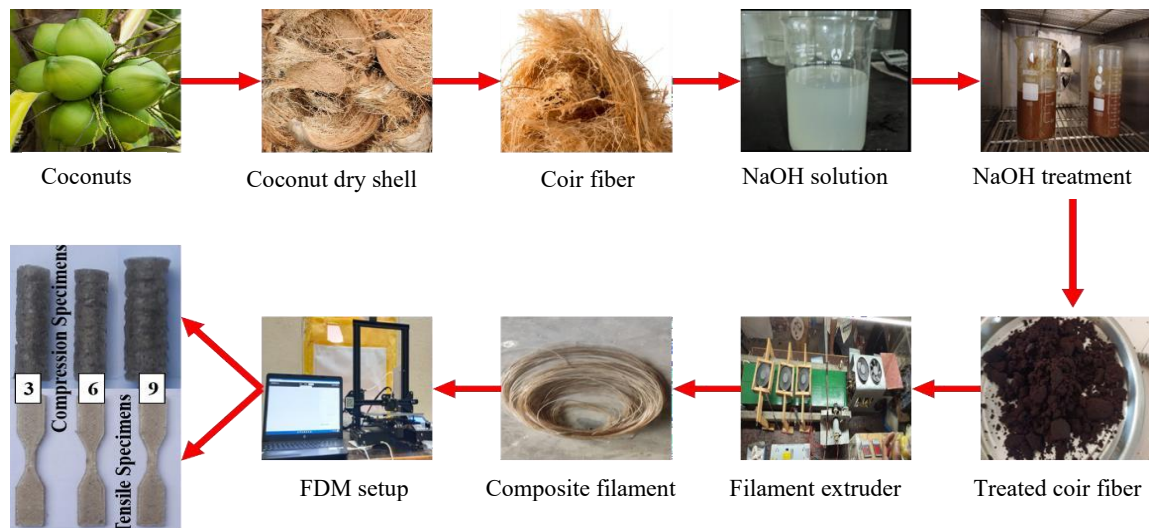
Processing of coir fibres and fabrication of PLA composite samples by FDM.
